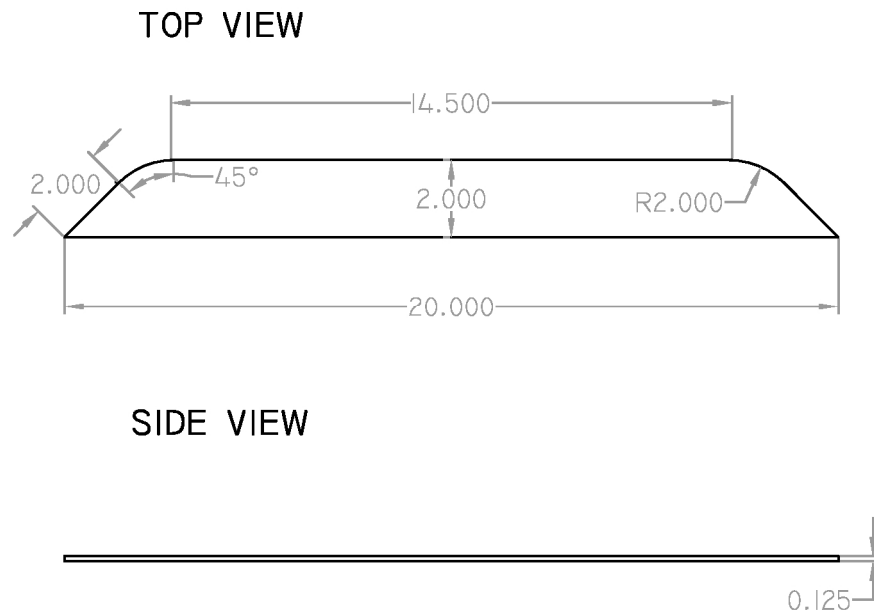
Blueprints of the parts used to build the second version of the heat flow measurement device with multiple holes: (a) horizontal plate. Dimensions are in inches.
